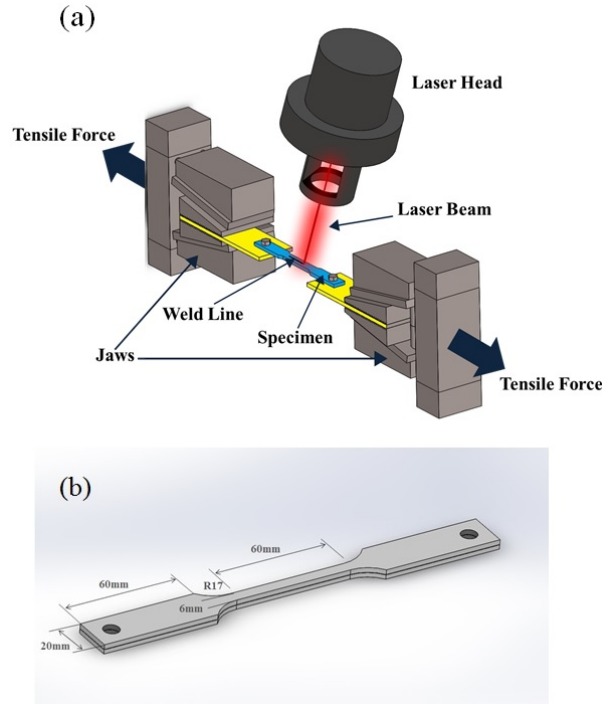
(a) The developed setup to apply external loading during laser lap welding, and (b) a schematic illustration of the lap joining specimen geometry and configuration.
